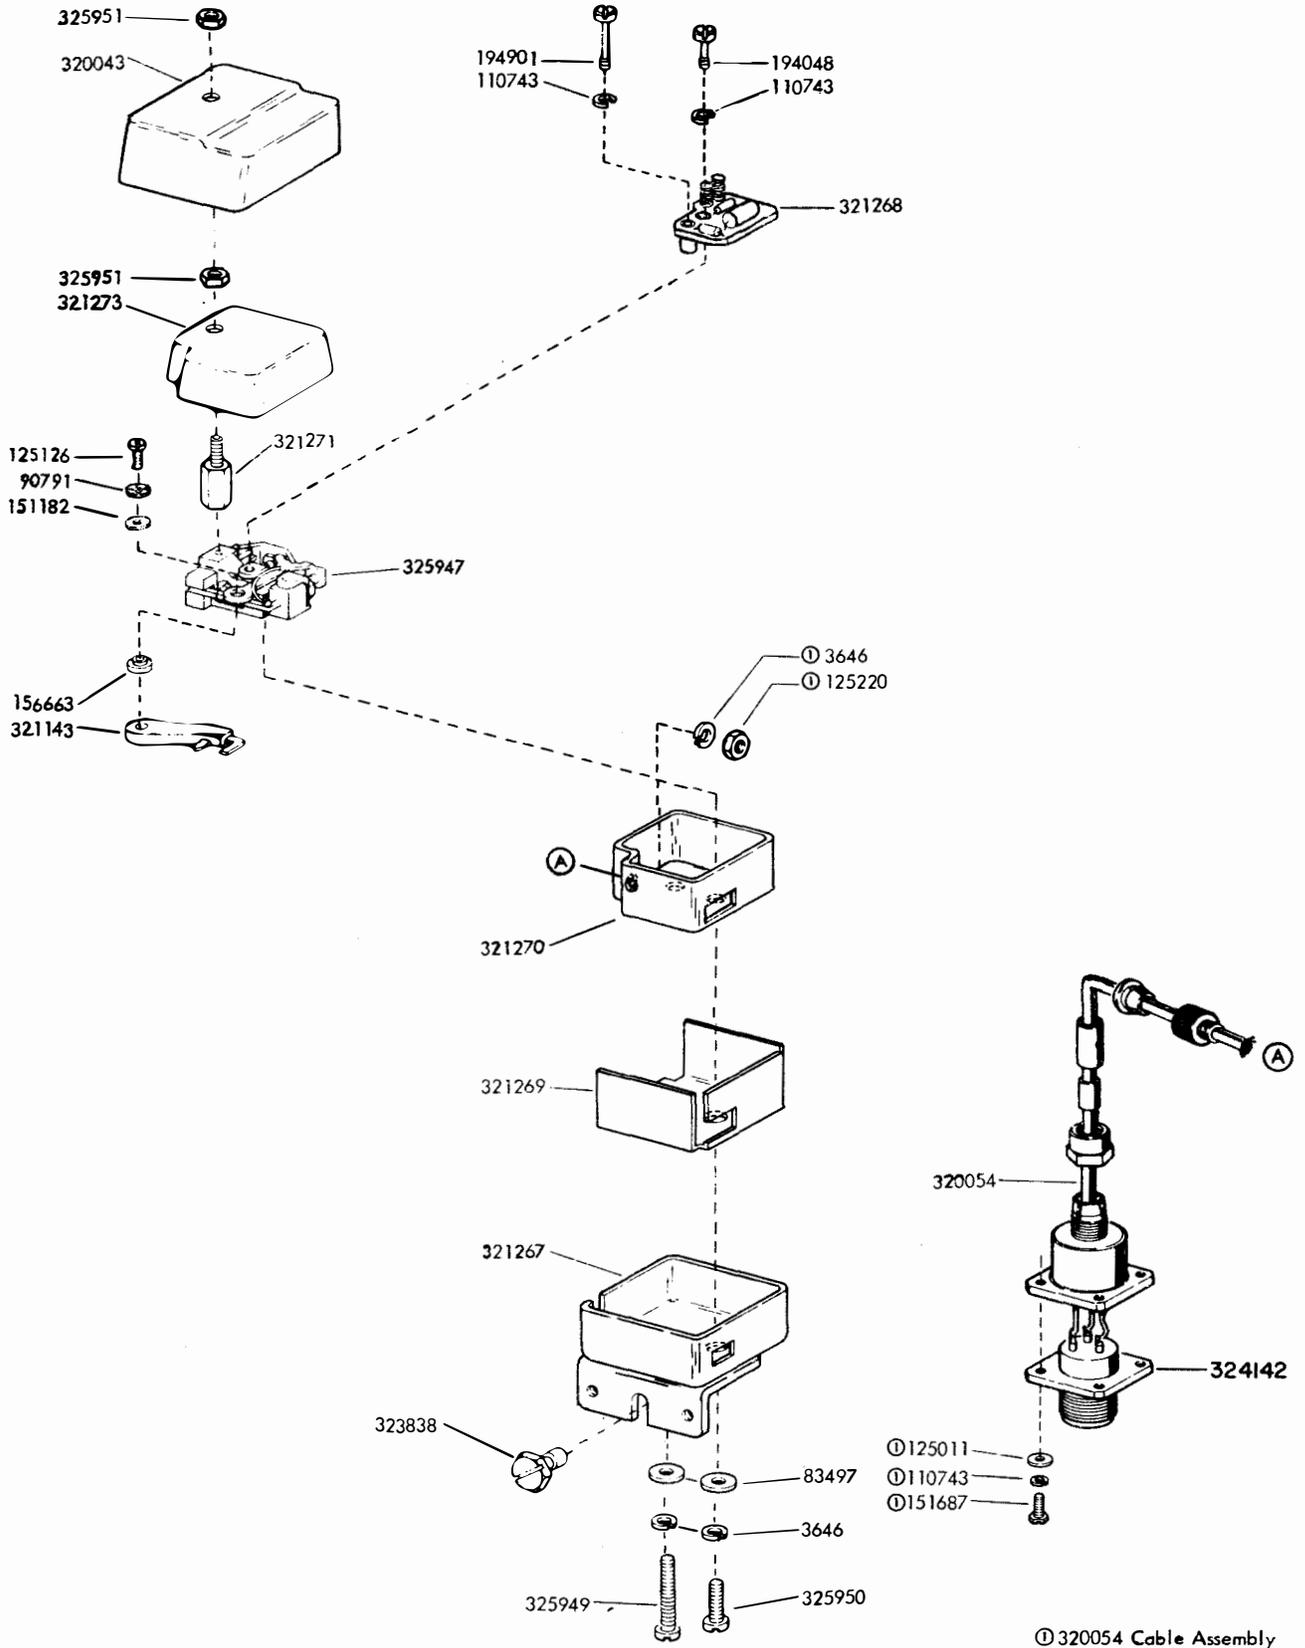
Contact Box Assembly 323646 - RFI Suppression Features for Low-Level Sets
